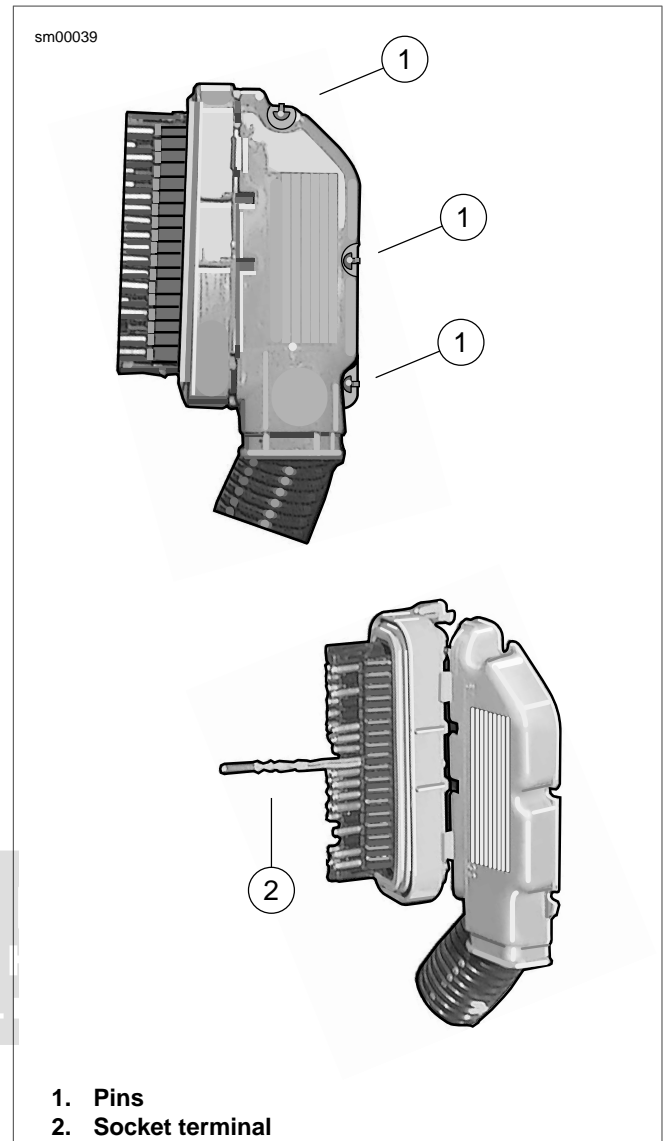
Packard 100W Connector: Separate Halves of Socket Housing
